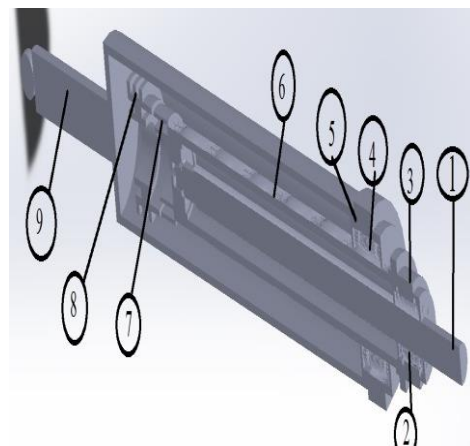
Sectional view of the complete telescopic roller screw actuator assembly
